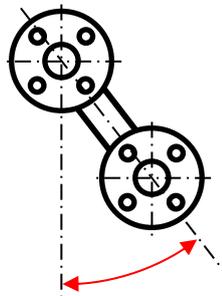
Irregular weld angle resulting from the suggested design, drawn with red arrow.
